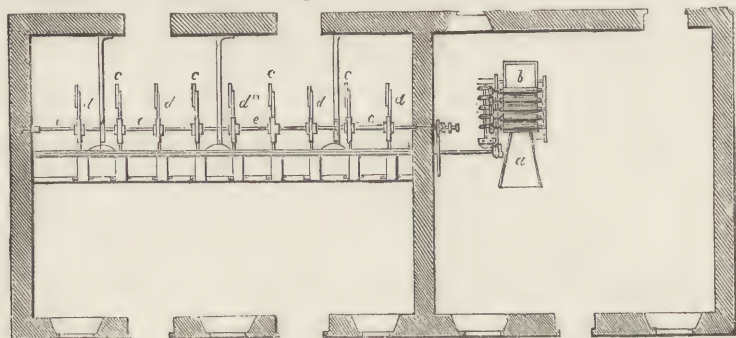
PLAN OF MACADAM'S FLAX-ROLLING AND SCUTCHING MACHINERY.
